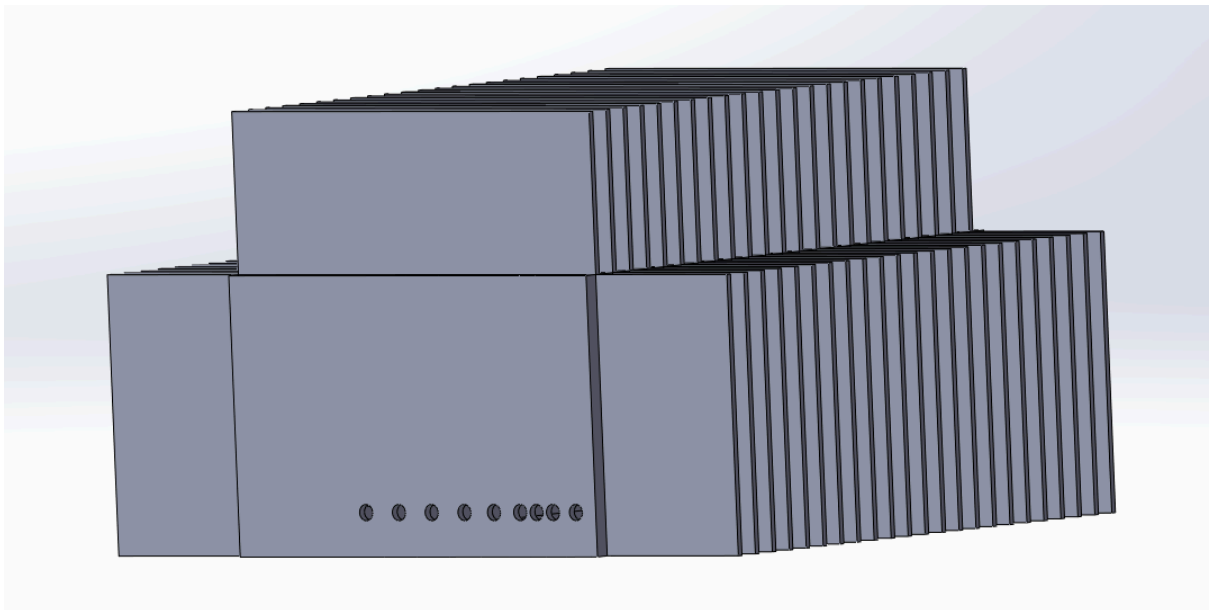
3D view of the side part of the casing and heat sink (b)
